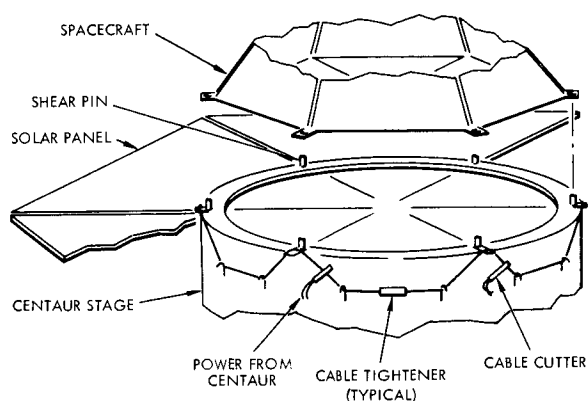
Separation Joint Assembly Showing Cable Connection
